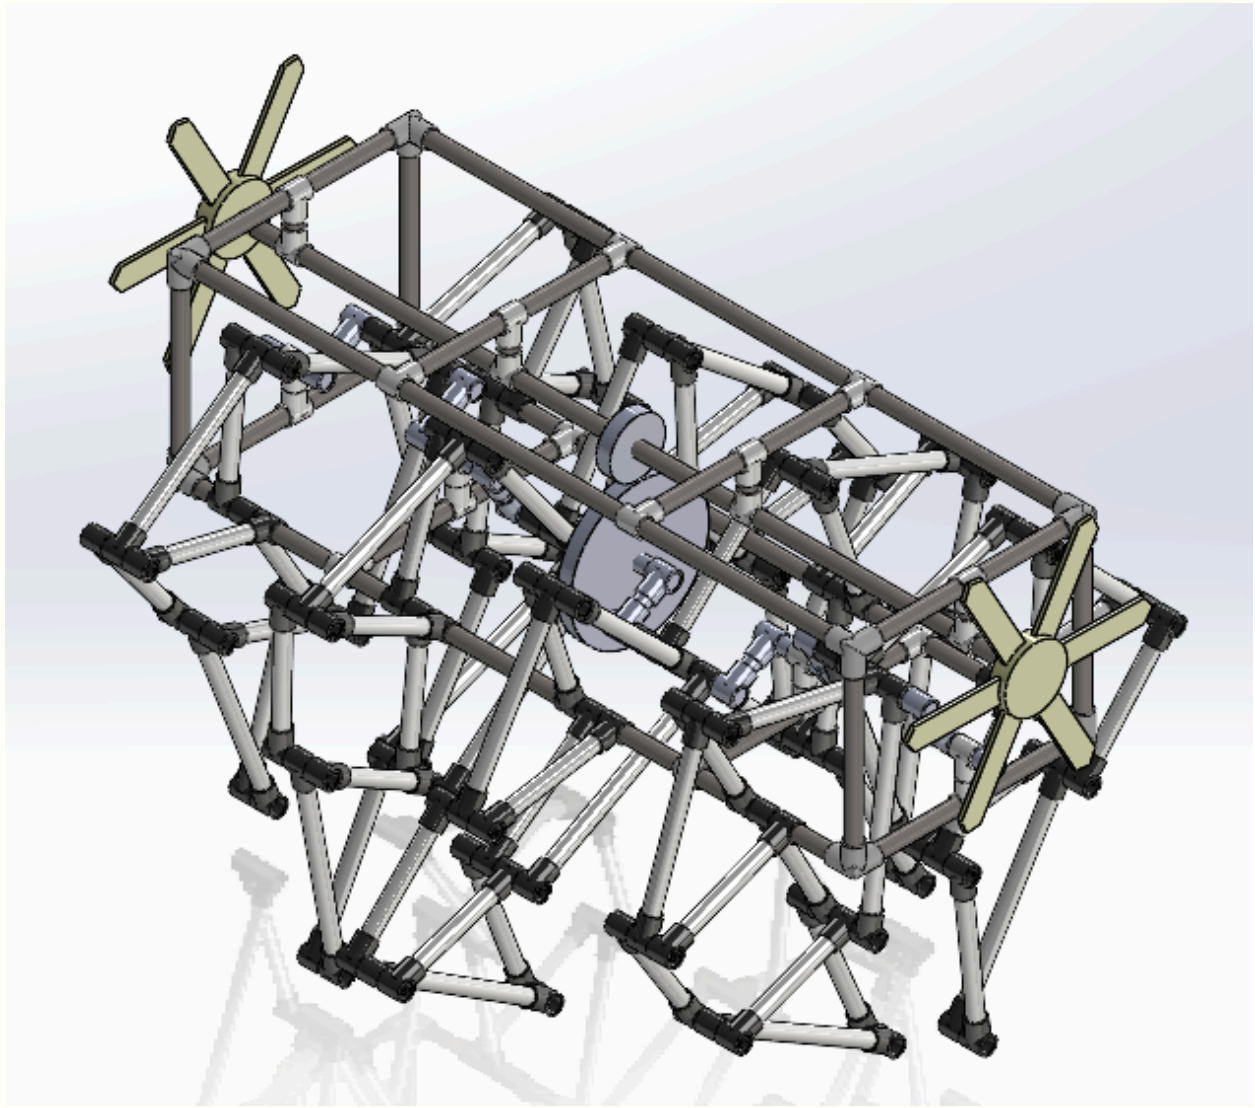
Solidworks Full Assembly Model (Isometric View)
